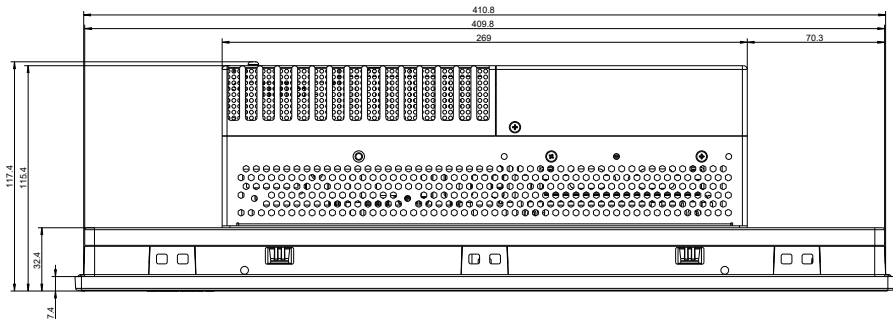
Housing dimensions of the device VR4x15, top view
